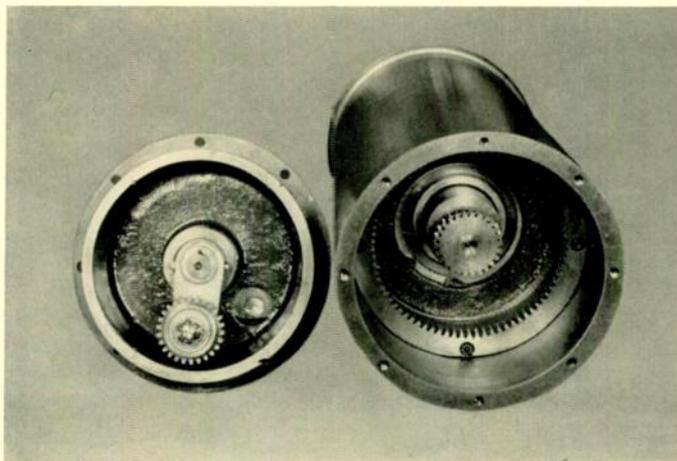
The differential mechanism of the position speed matching system. The planetary and sun gear are on the right, and the idler gear which meshes with both, is on its crank arm is on the left.
